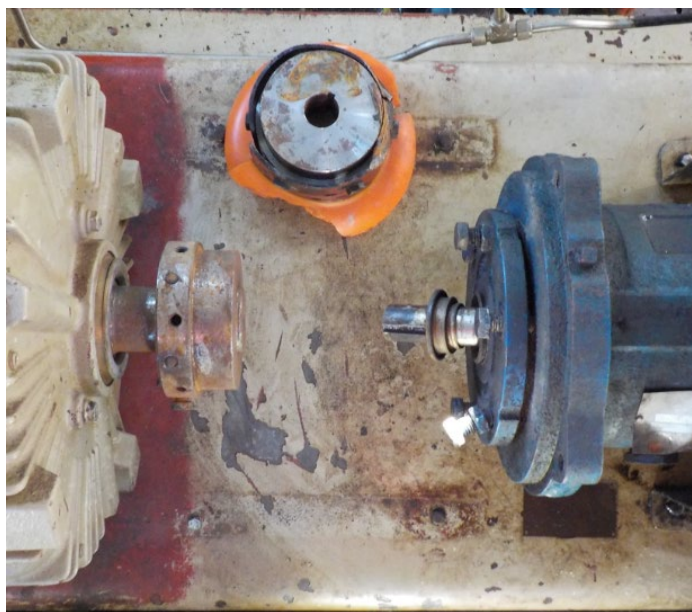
Damaged Lease Automatic Custody Transfer charge pump, electric motor and coupling.
